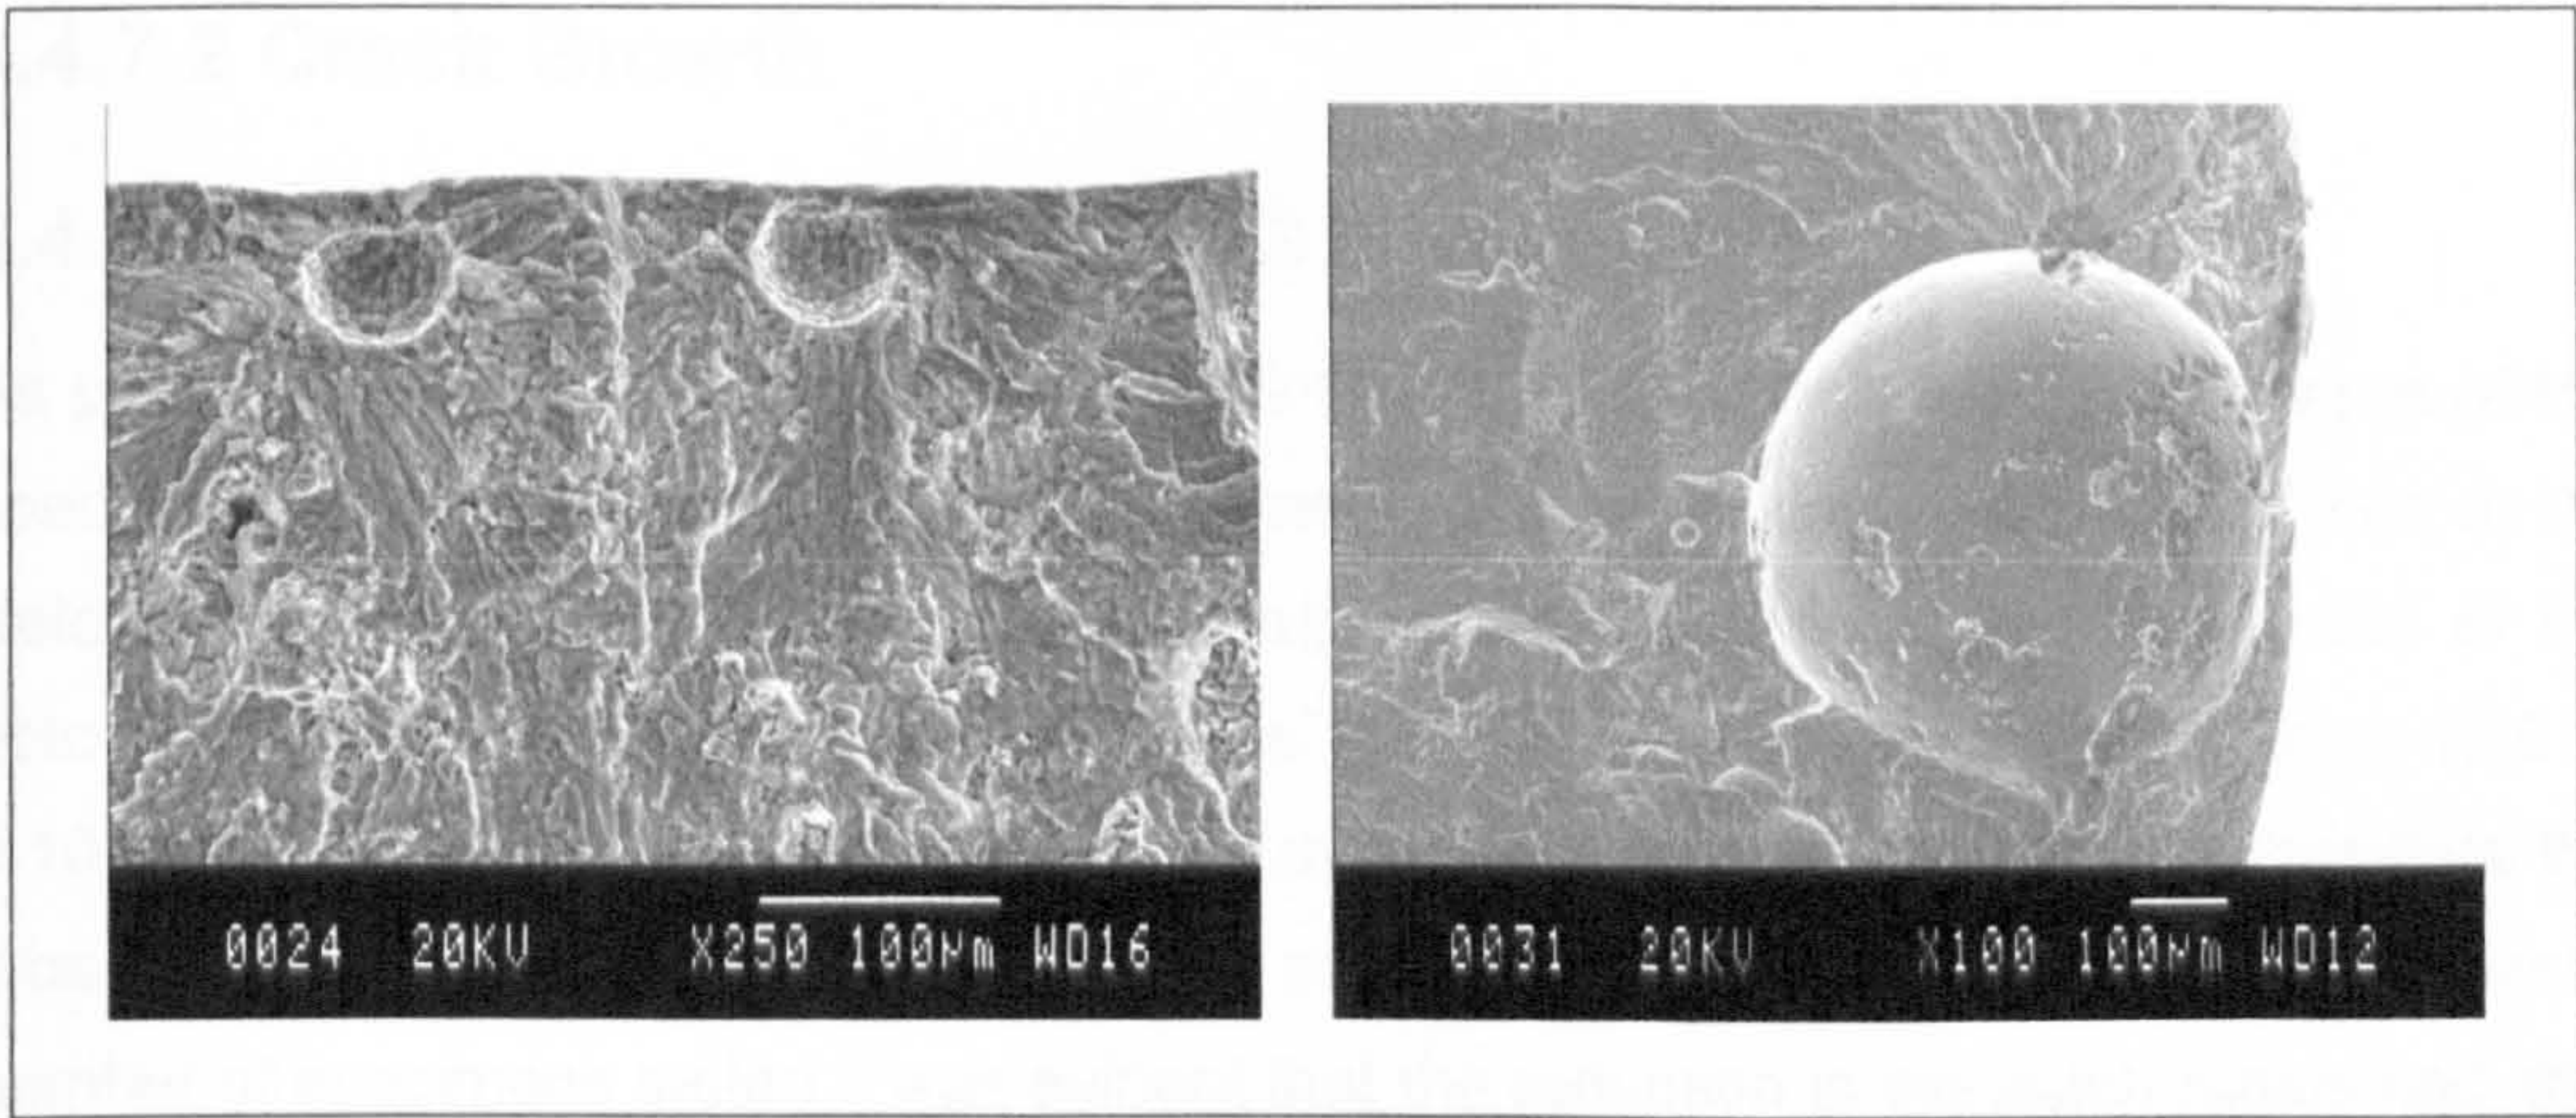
MIG LI SCG 1 (left) and 16 (right) porosity initiated weld metal fatigue cracks.
